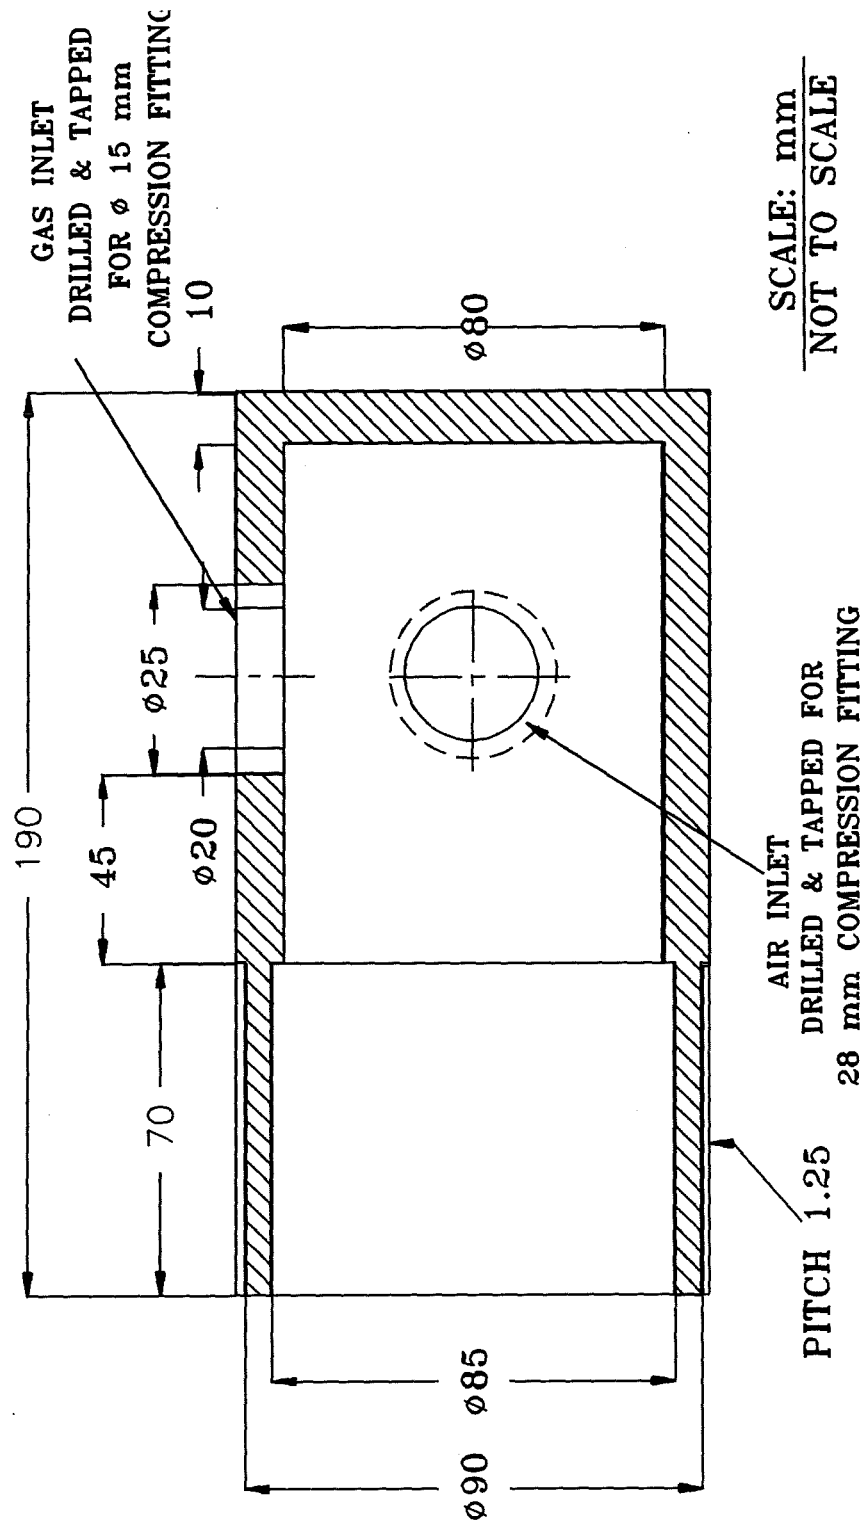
Sectional view of the mixer head for the 30 kW pulsed combustor.
